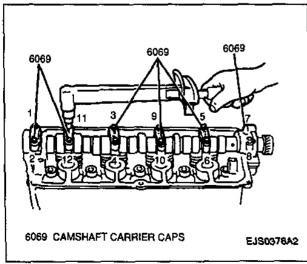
Camshaft Center Cap Bolt Tightening Sequence
